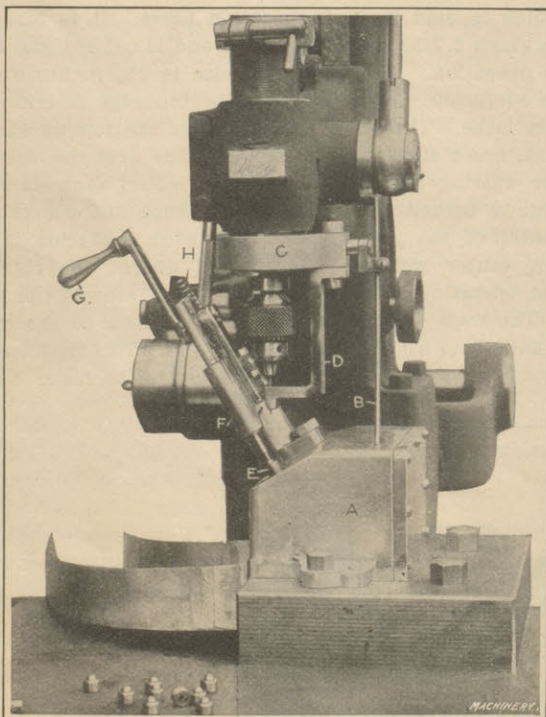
Drilling Fuse Plugs on "Avey" Drilling Machine
